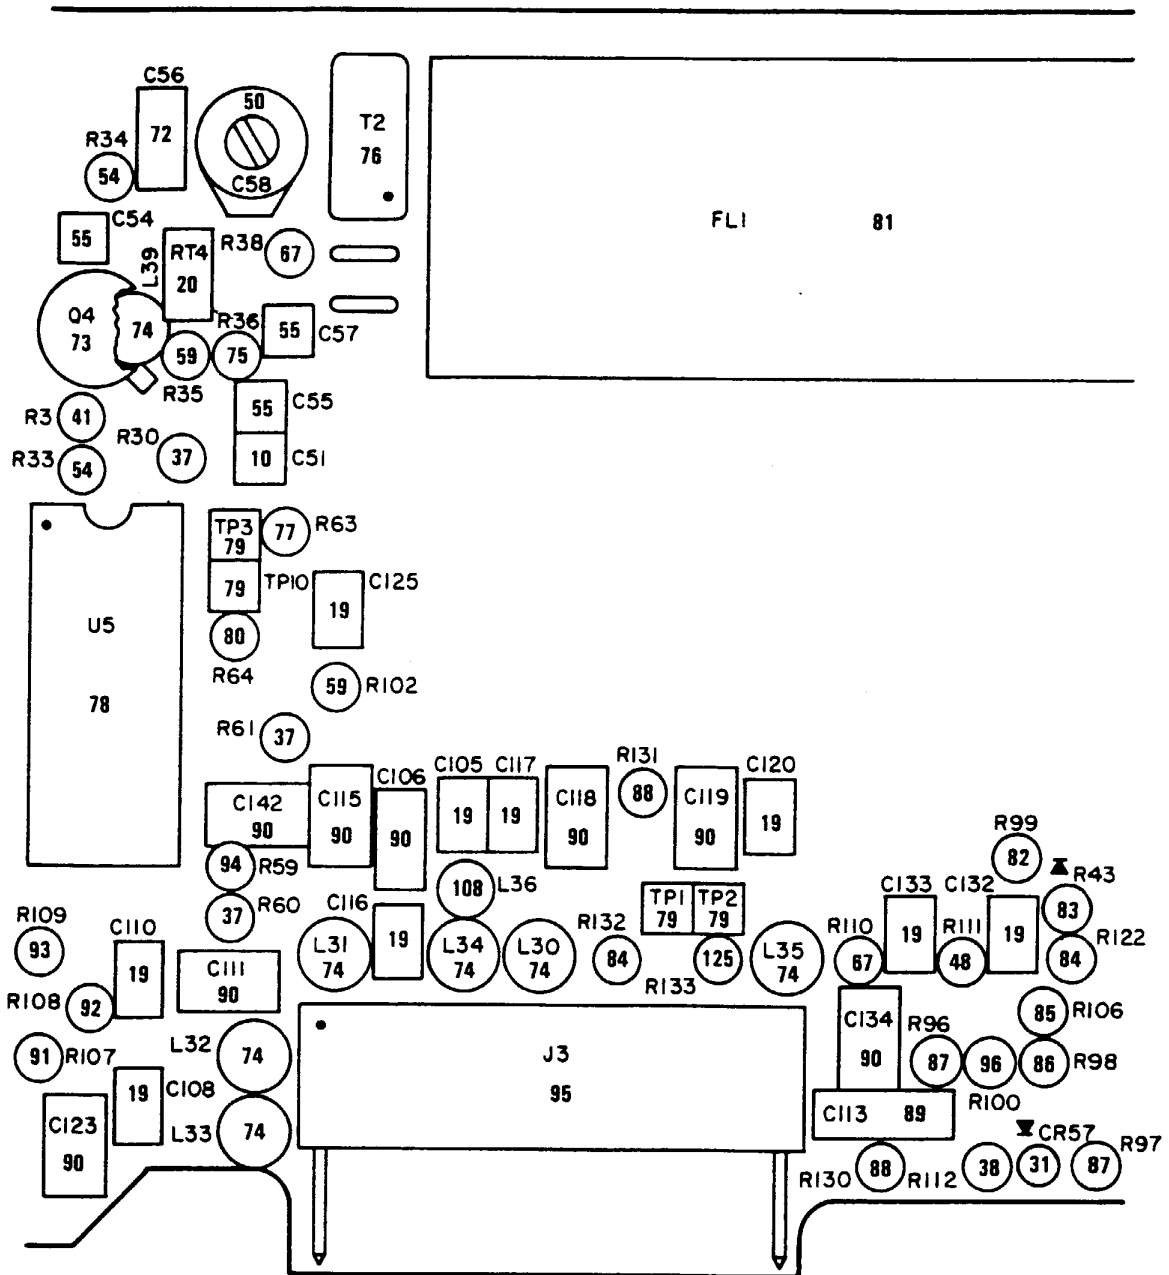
Main Receiver Circuit Card Assembly (Sheet 1 of 5)
